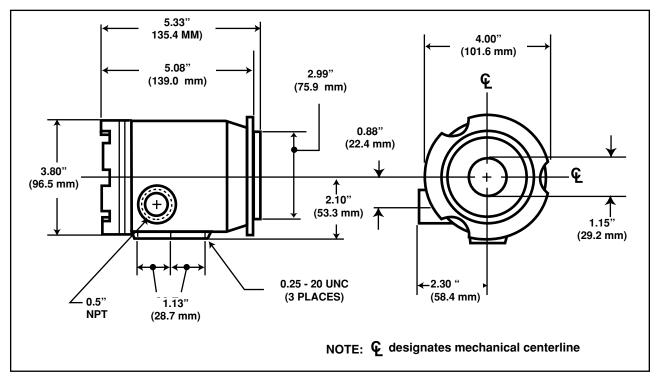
DIMENSIONS AND CLEARANCES OF STANDARD CASTING
